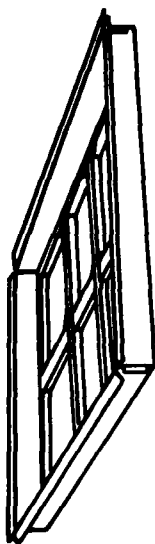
LDEF Peripheral Tray Assembly, 3-in. Depth
